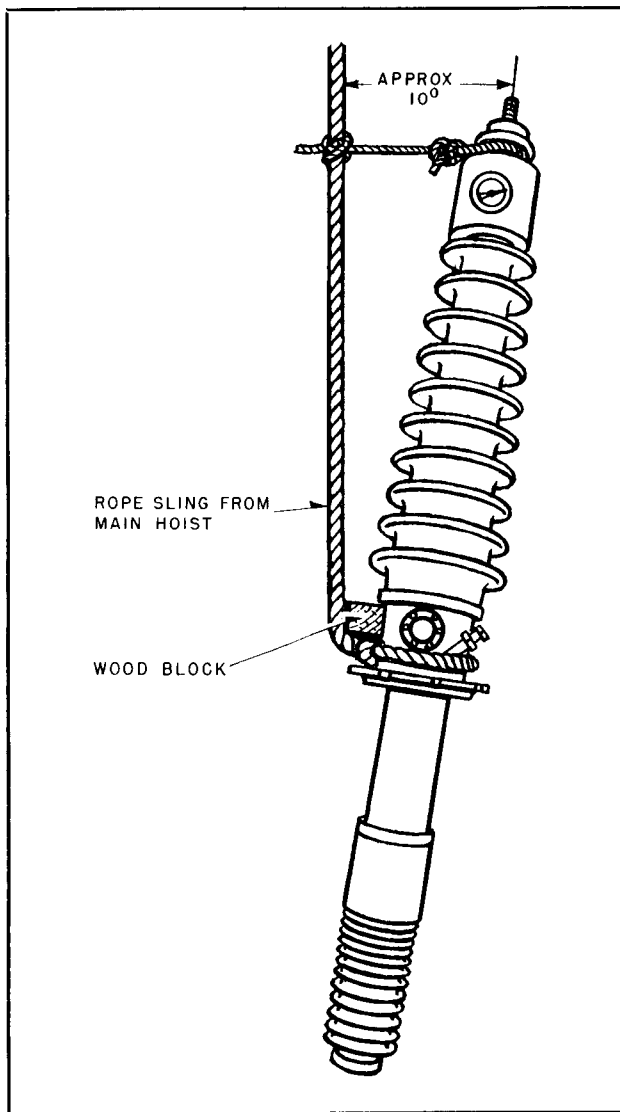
Method of Suspending a Condenser Bushing at Proper Angle for Inserting Into Tank Top
